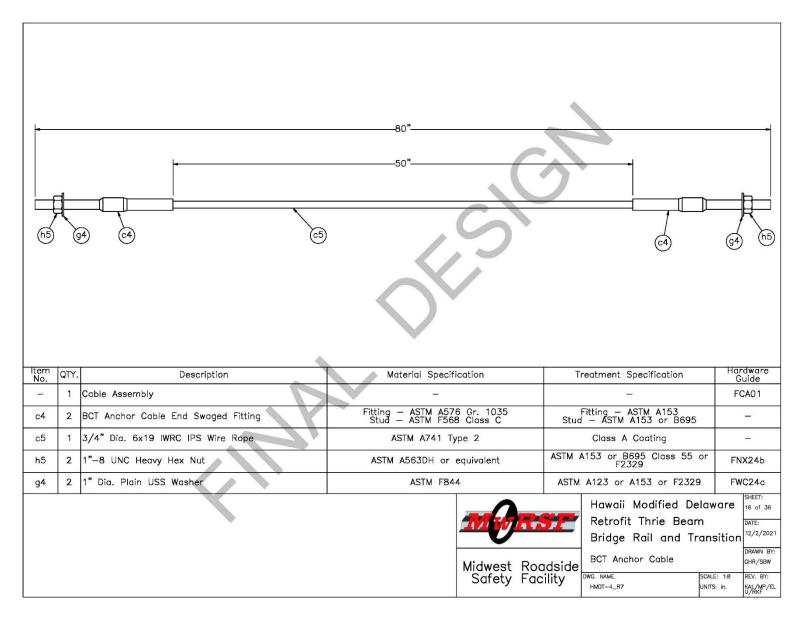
BCT Anchor Cable, Test No. HMDT-4
